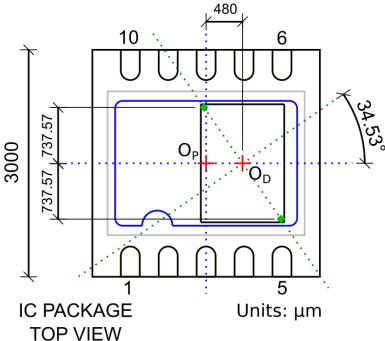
Technical Drawing showing DIE placement within the package. The Hall-Plates are shown as the two green pads in the corners of the DIE. Package axis and hall-plate axis are also shown.
